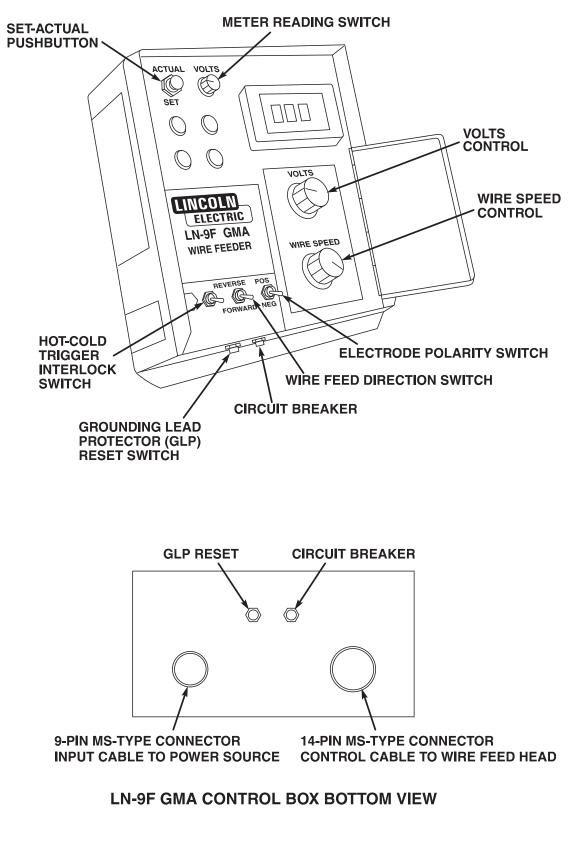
WIRE FEEDER CONTROLS FOR LN-9F GMA
